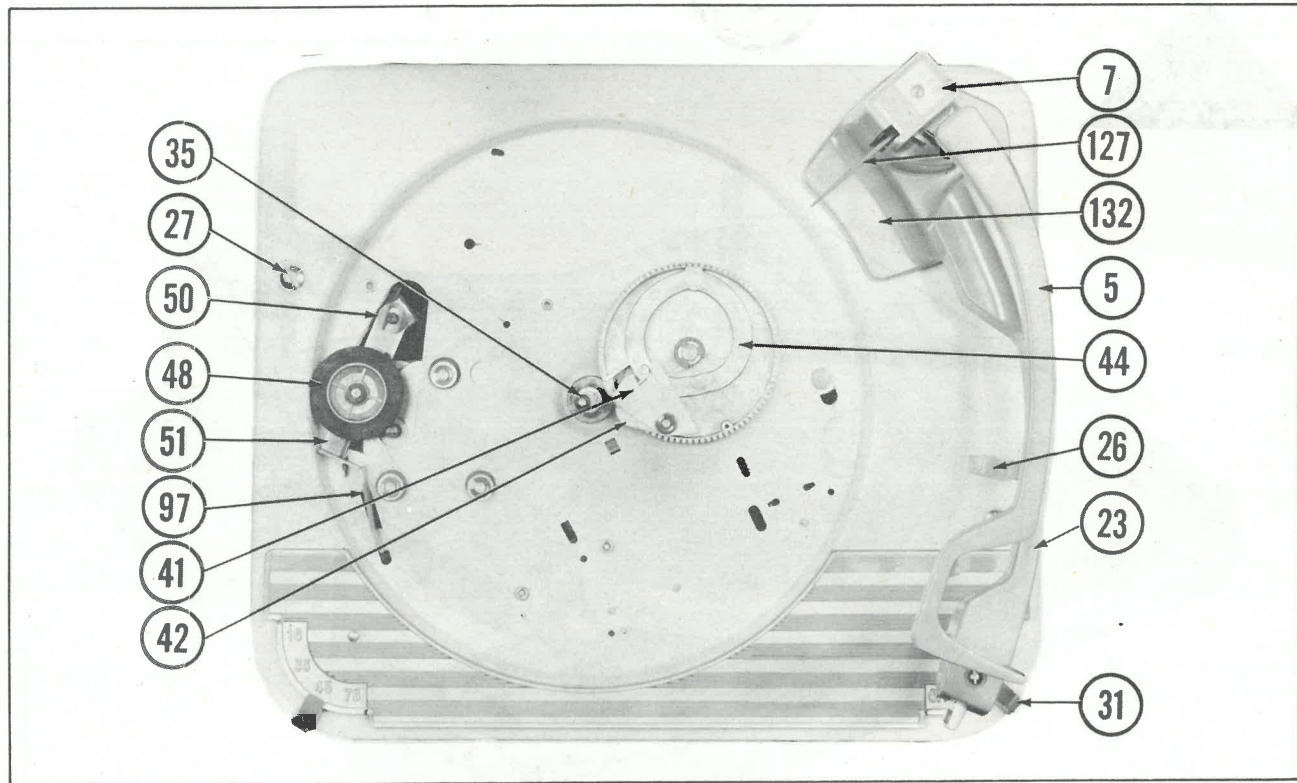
TOP VIEW OF MECHANISM WITH TURNTABLE REMOVED
